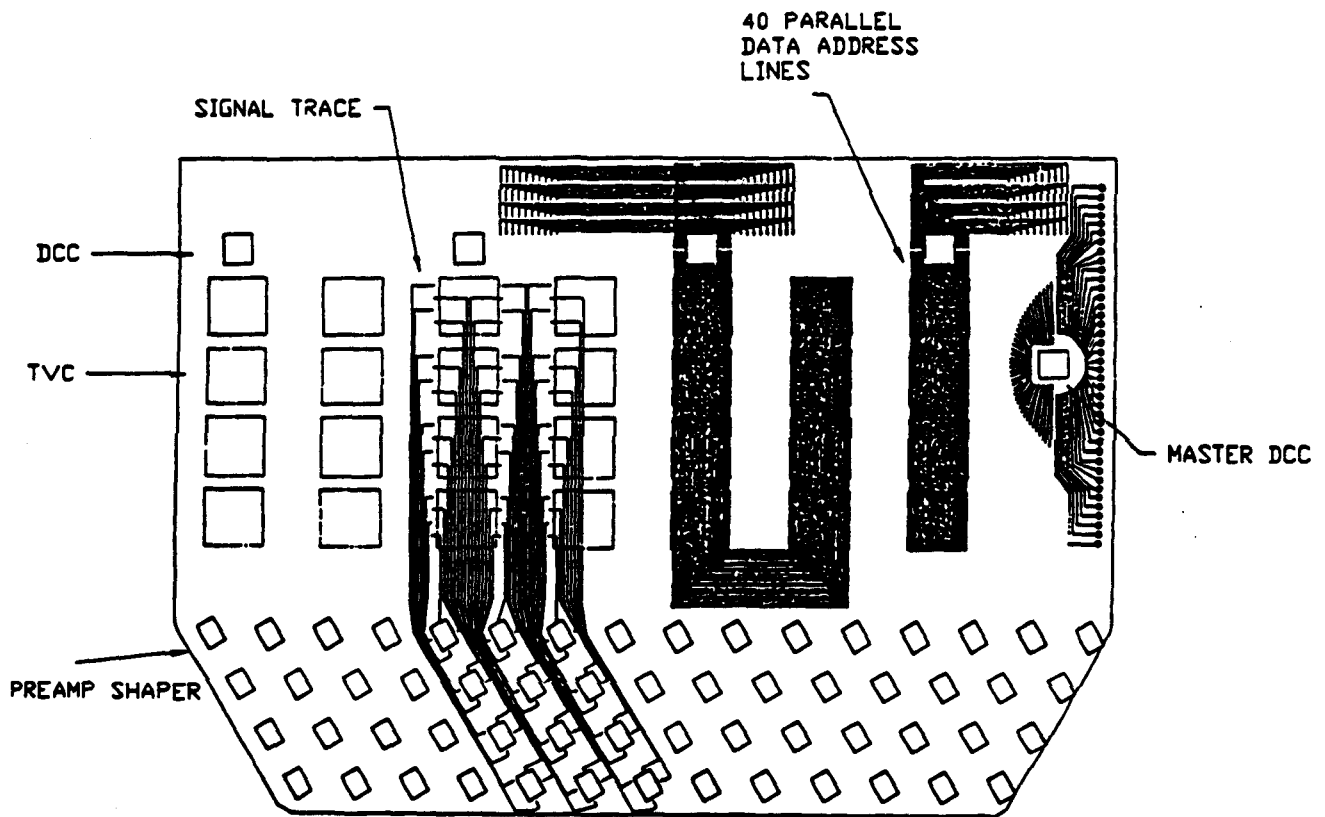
A view of the connection of the front end printed circuit board that connects to the cap plate.
